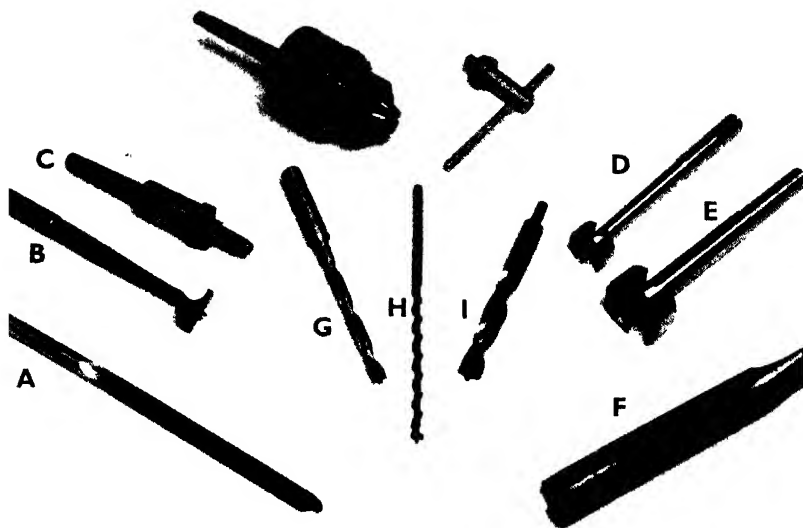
(*above*): Various types of boring tools: (A) parrot nose (B) centre bit (C) counter borer (D) and (E) forstner bits (F) shell auger (G), (H) & (I) twist bits
